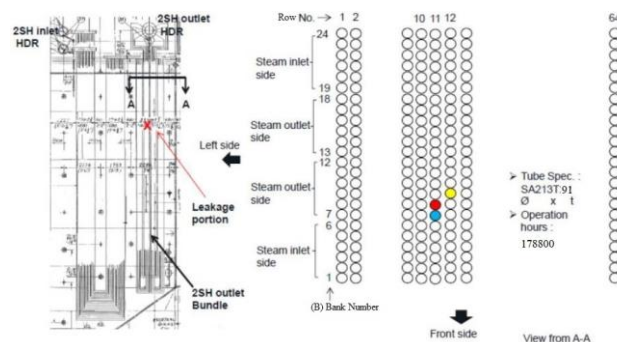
Secondary Superheater Outlet arrangement and tube leakage on April 2018 [7]
